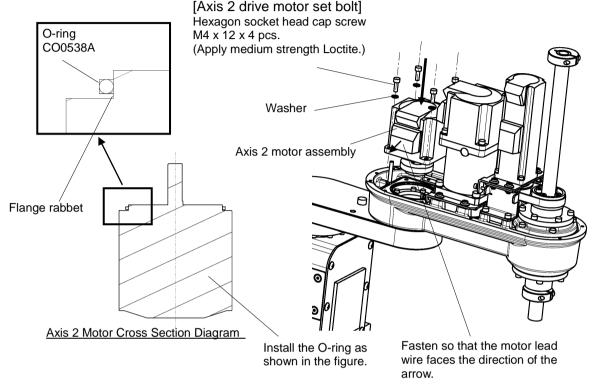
Mounting axis 2 motor assembly (KHL-300, KHL-400)
